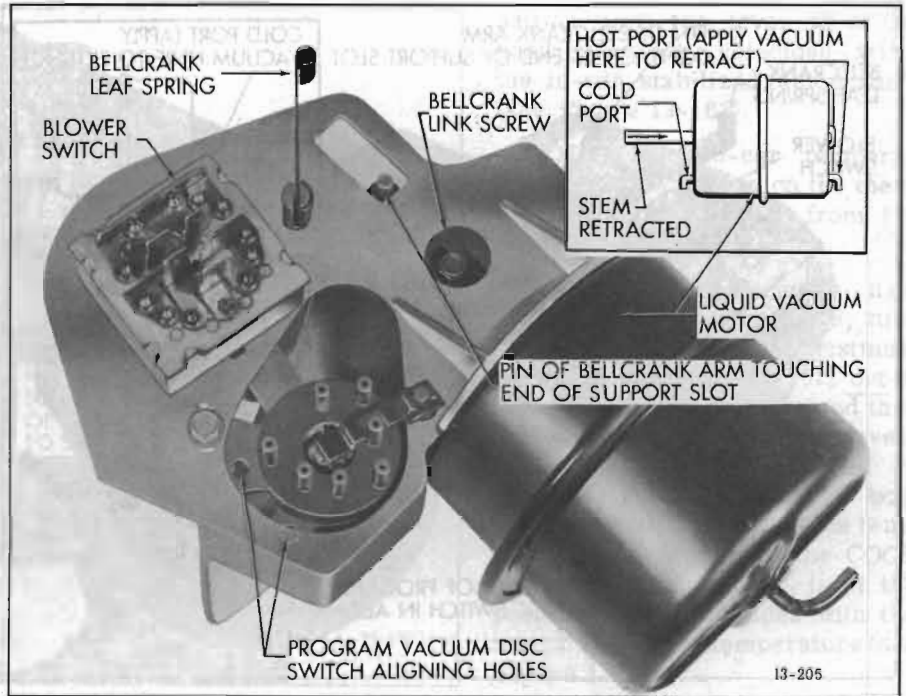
Liquid Vacuum Motor with Stem Retracted (49000 Series)
